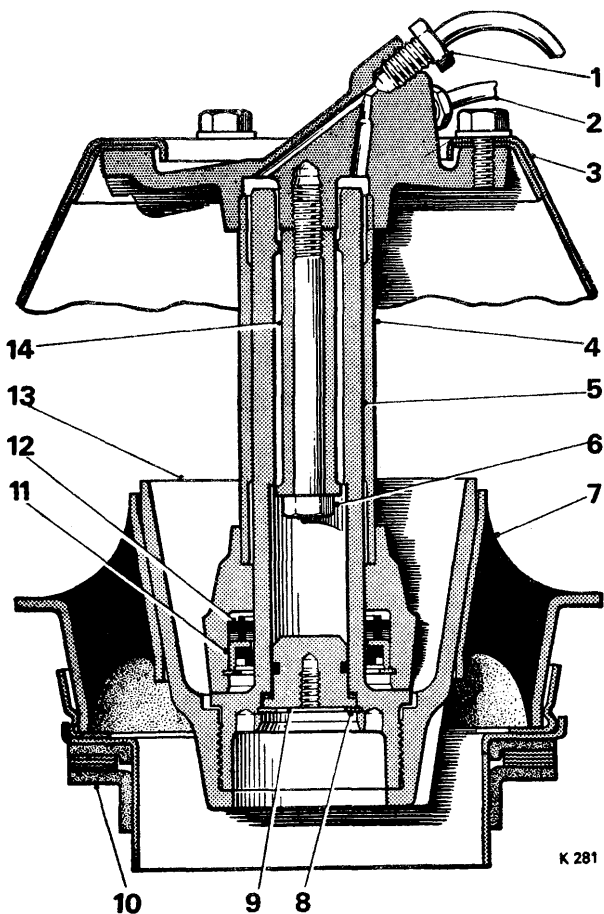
SECTIONAL VIEW—REAR HEIGHT CONTROL RAM—LATER DROPHEAD COUPE CARS
